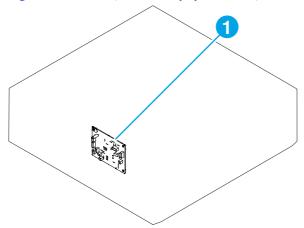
Major assemblies (550-sheet paper feeder; 2 of 2)
